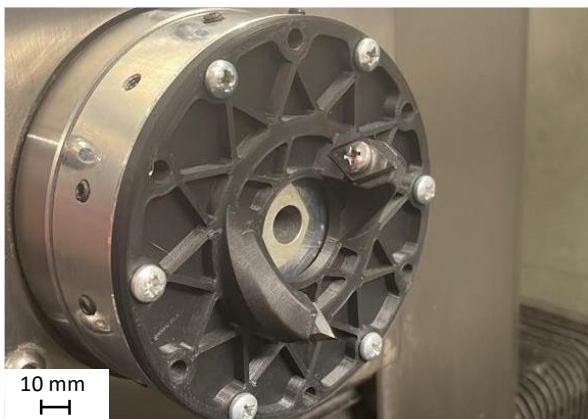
Additively manufactured flycutter mounted to the spindle of the ultra-precision machine tool
